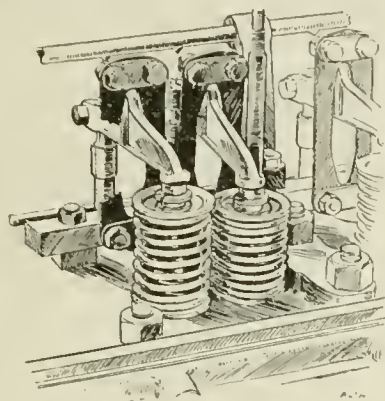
VALVE-OPERATING GEAR OF THE ASTER ENGINE
